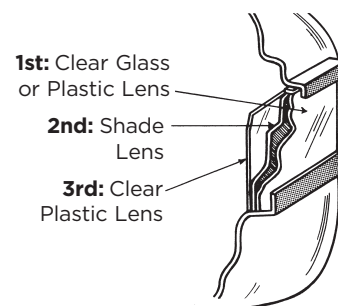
Typical Lens Assembly for Arc Welding
